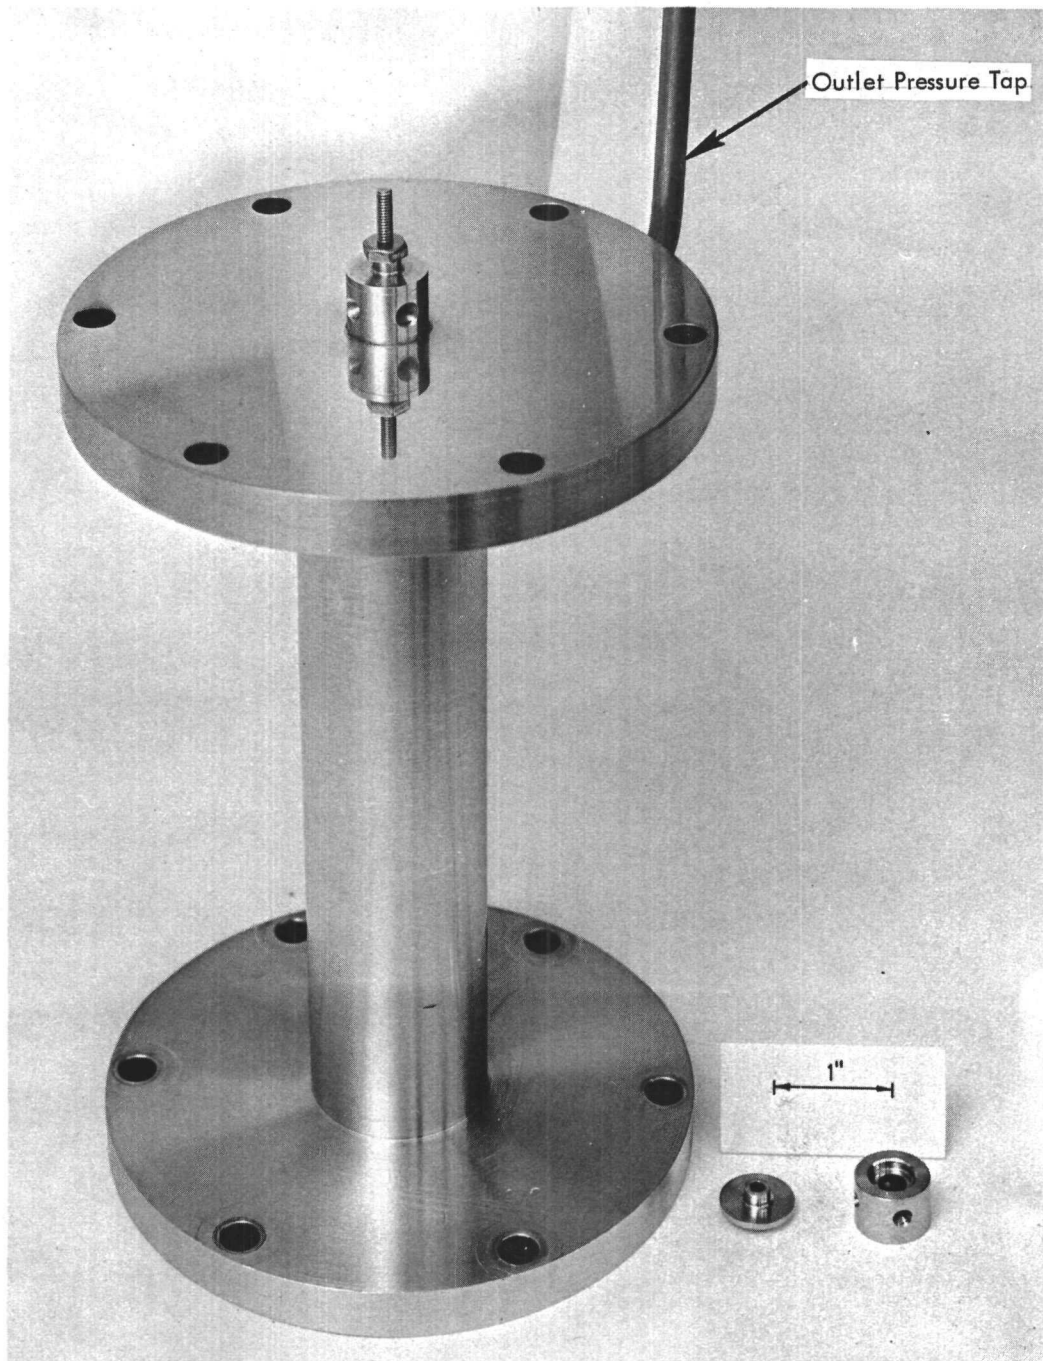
Tie Rod Centering Bushing Test Fixture
